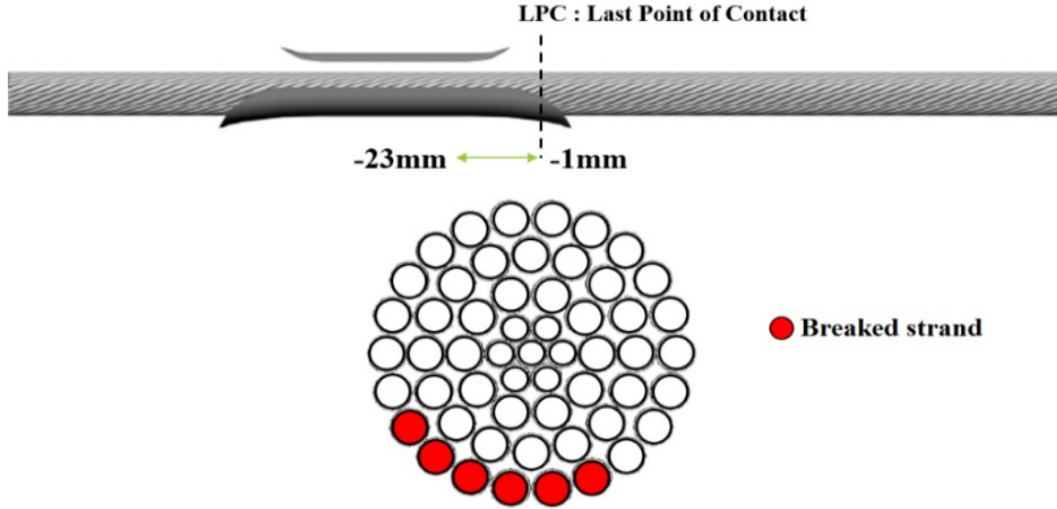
Fatigue breaks position in the studied clamp/conductor assembly
